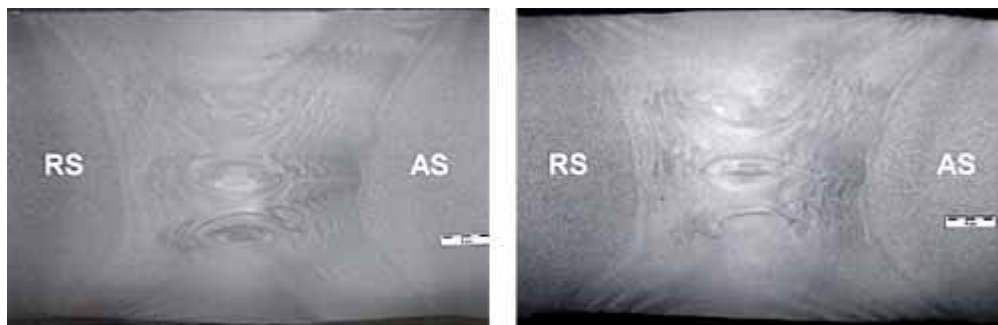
Cross section of the hourglass-shape in 6082 aluminum FSW with bobbin tool [31]. RS is the retreating side and AS is the advancing side.
